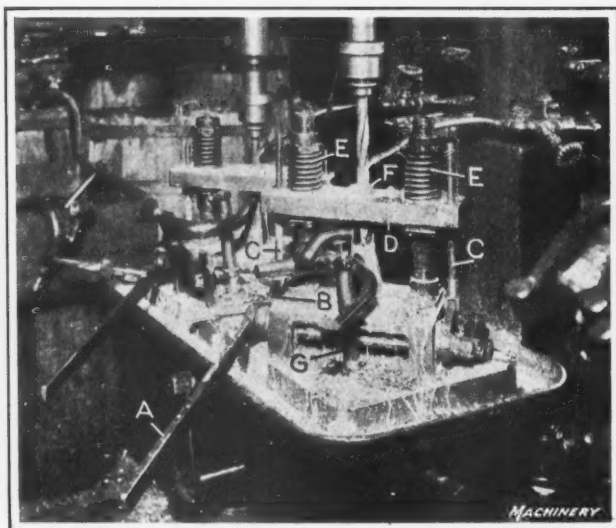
Universal Drilling Jig used at the Chandler Plant for drilling and reaming Motor Car Steering Arms
